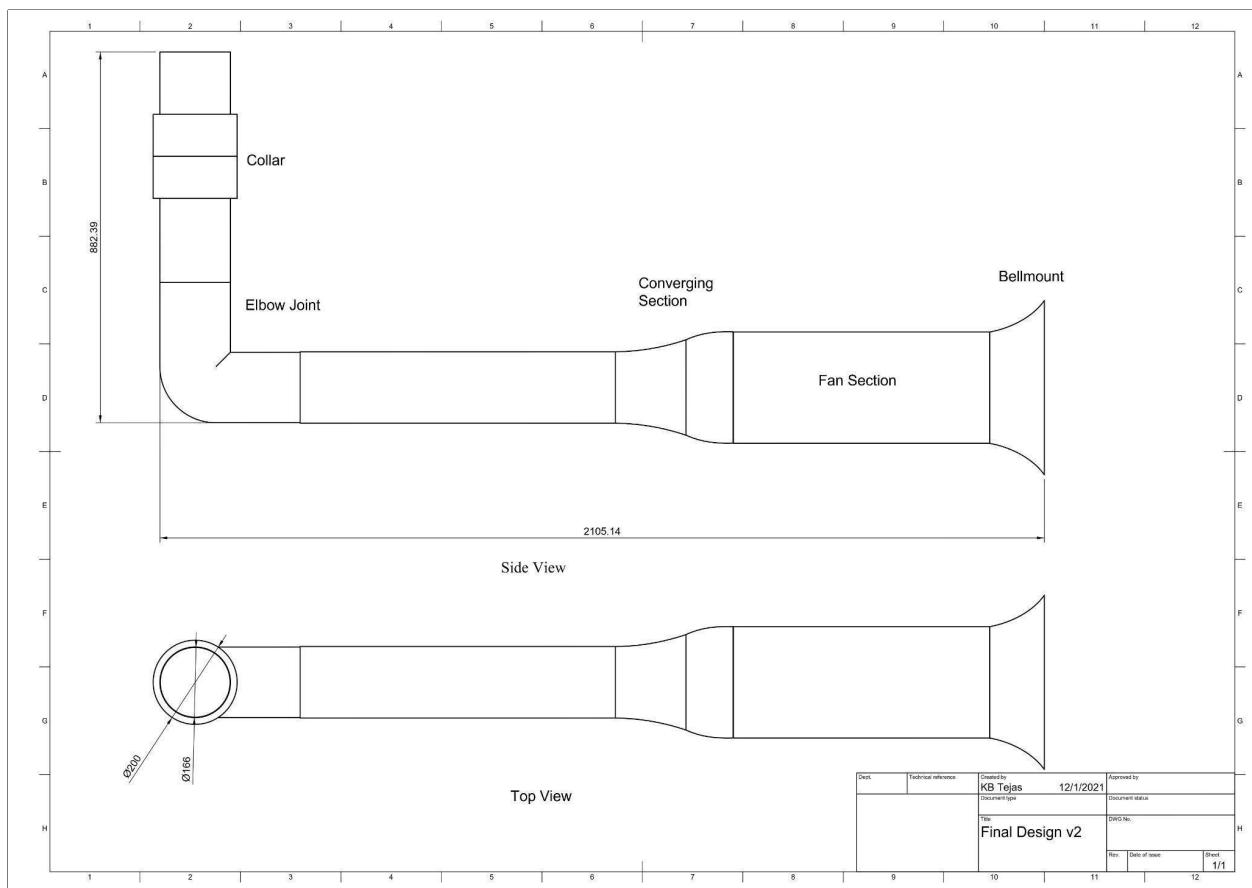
Engineering Drawing of the Vertical Wind Tunnel
